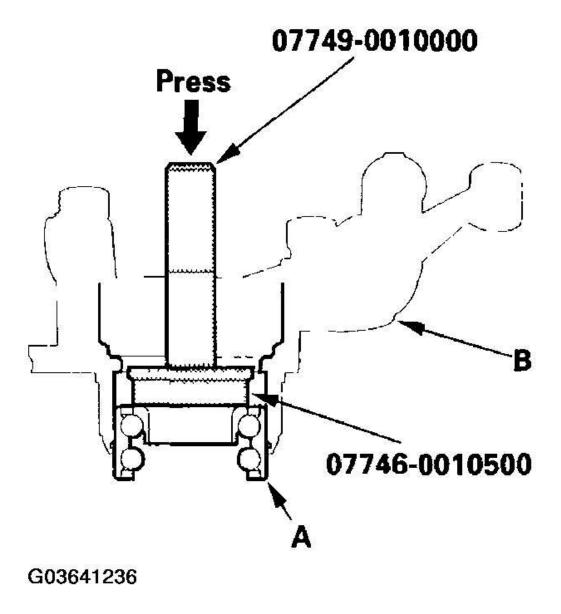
Pressing Wheel Bearing Out Of Knuckle Courtesy of AMERICAN HONDA MOTOR CO., INC.
